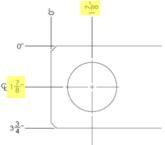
Drill 1/8" diameter holes 14b) Drill 1 3/4" diameter hole 14c) Finished Upper Pylon
